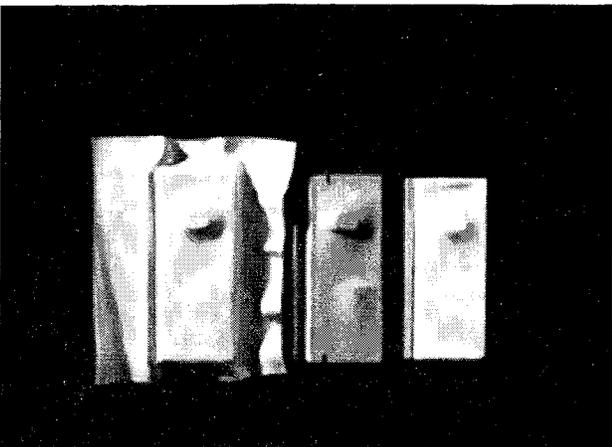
Example of milled panel formwork, vacuum formed panel, and cut final panel.
